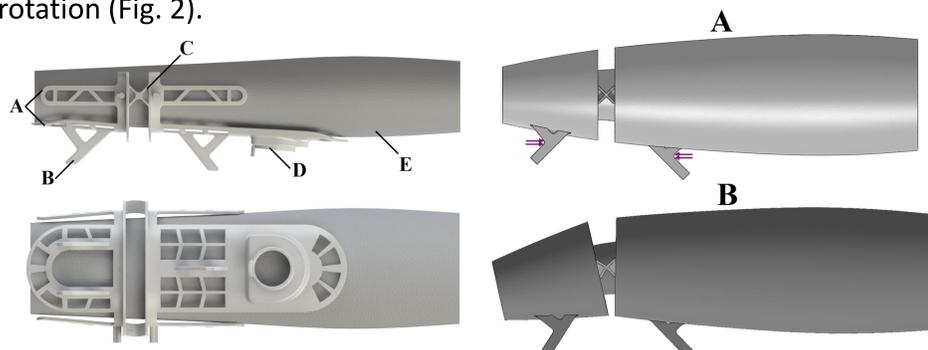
Cast attachment placed over padding : (A) main body, (B) guide hooks, (C) truss joint, (D) dial mount (E) cast padding.
